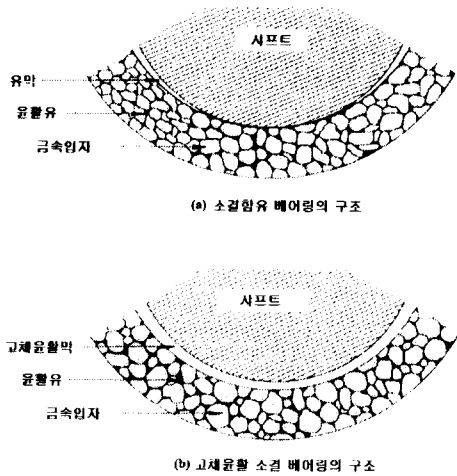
Structure of impregnated oil and solid lubricant oiles bearing
